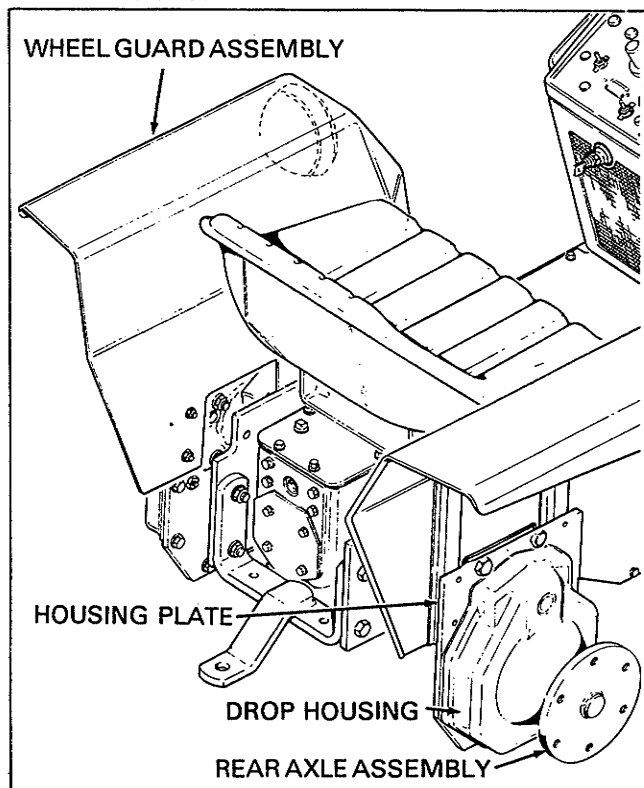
Wheel Guard, Drop Housing, and Rear Axle Group
